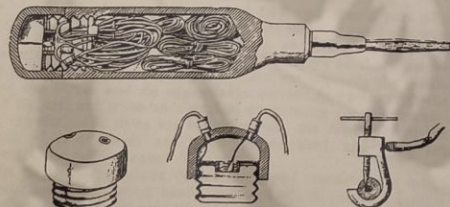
BAGGETT FUSE REPAIR SCREW DRIVER, CASE REMOVED, ALSO LAMP CAP AND WIRE CLAMP.
